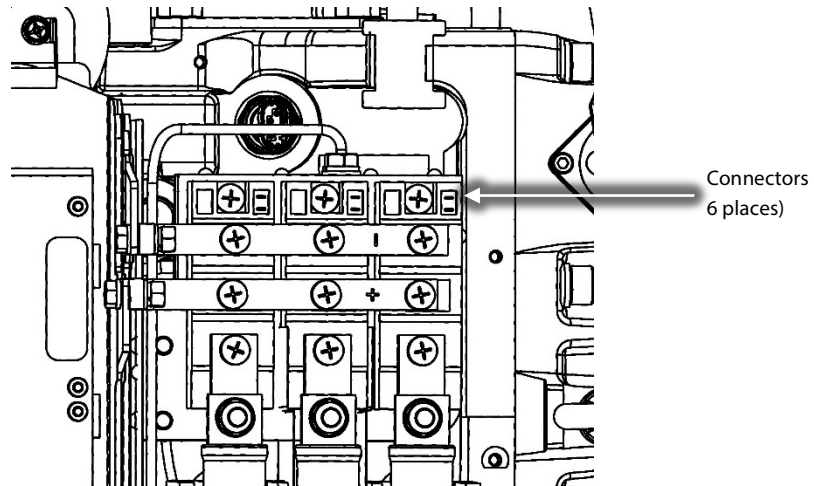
Soft Start SCR Gate Cable Harness Removal
